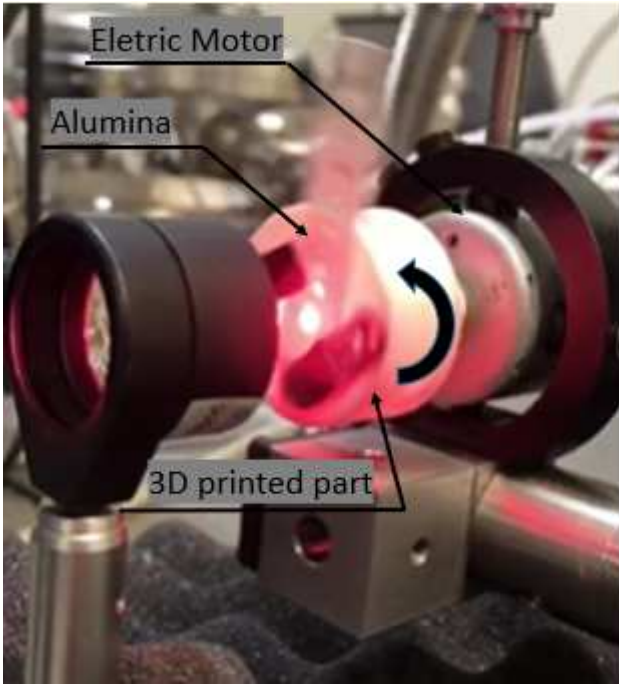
Alumina plate coupled to the micromachining rotary system (electric motor with 3D printed part).
